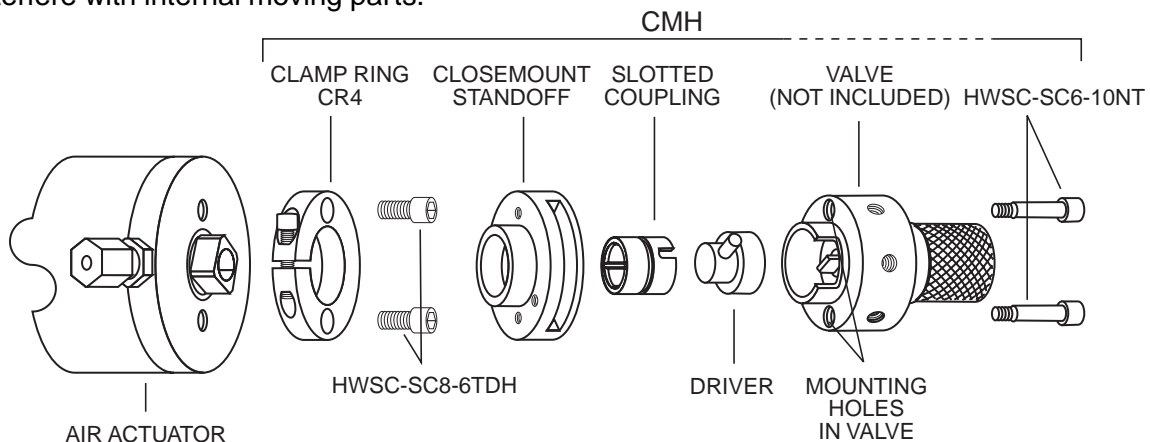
Valco valve (two mounting holes) on an actuator with closemount hardware
